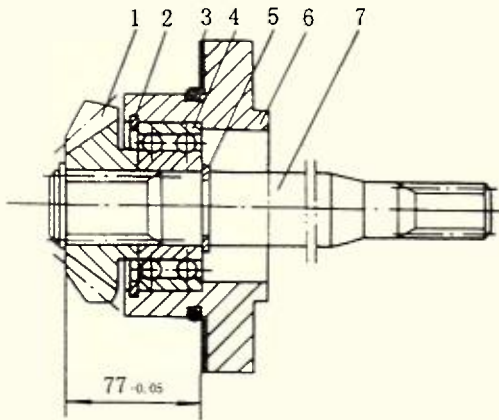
6 Meshing adjustment of the front final drive spiral bevel gear pair
